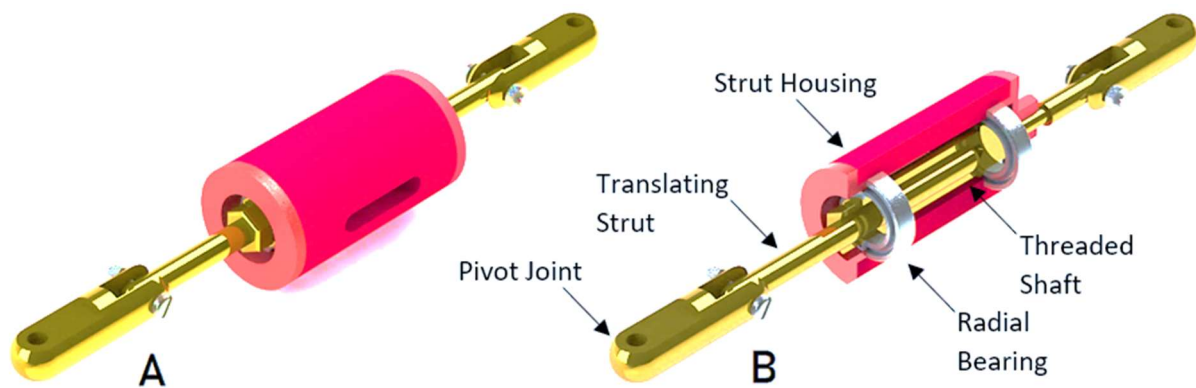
Concept 1 – (A) The Longitudinal Element Mechanical System developed for Finite Lengthening (B) A half section of the completed assembly, detailing the integration of radial bearings to the rotation and translation of the element shaft.
